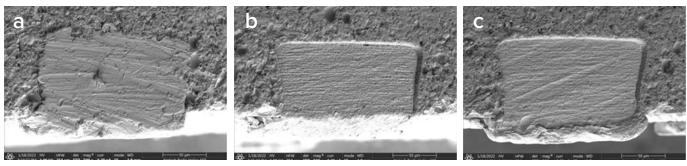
Pretreatment and tin plating of QFN side flanks: a) After QFN singulation; b) After cleaning and microetch; c) After tin plating.
